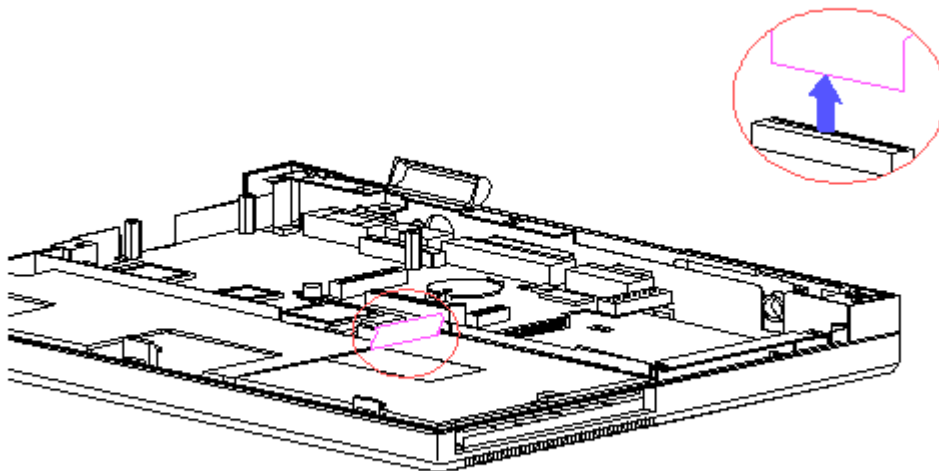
Removing the Diskette Drive Cable and LIF Connector
